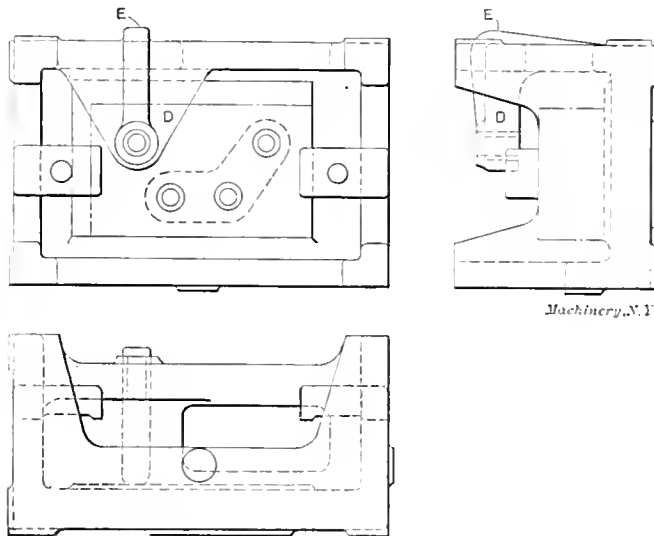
Modification of Jig in Fig. 91, which practically brings it into the Class of Open Drill Jigs.
